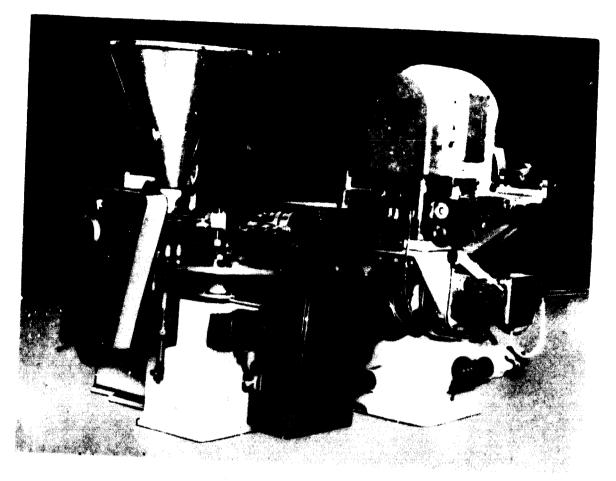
Packaging Machine for Container forming, filling, lidding and sealing
